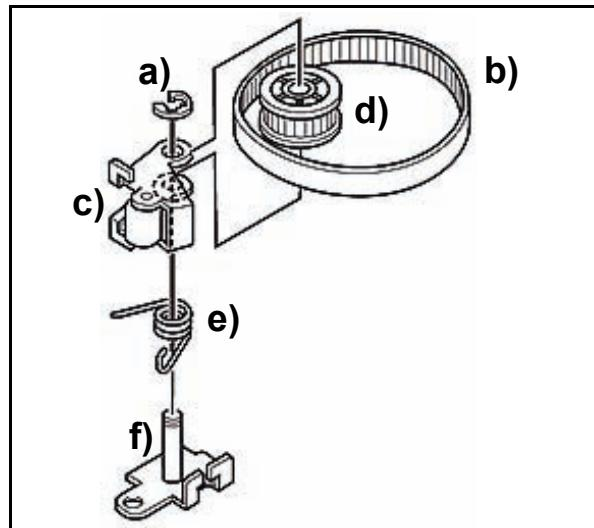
Acceptor Head Drive Gear Tension Unit Disassembly
